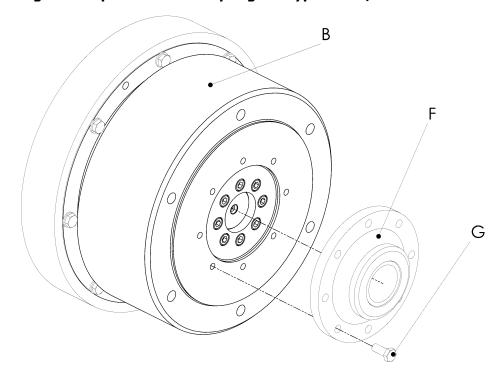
Mounting the output drive to couplings of type VFCO/VFSP
